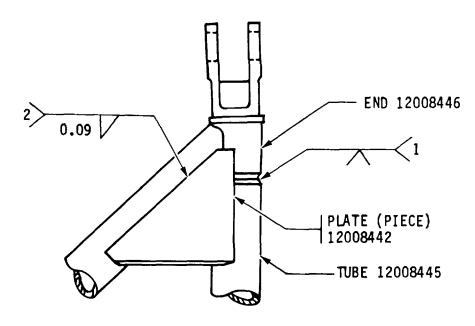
Repair welding procedure for plate 12008442 to end 12008446.
